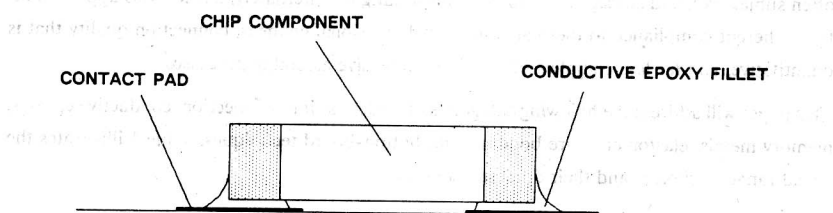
Chip components are similarly attached with epoxy as with solder but footprint pad dimensions can be tighter.
